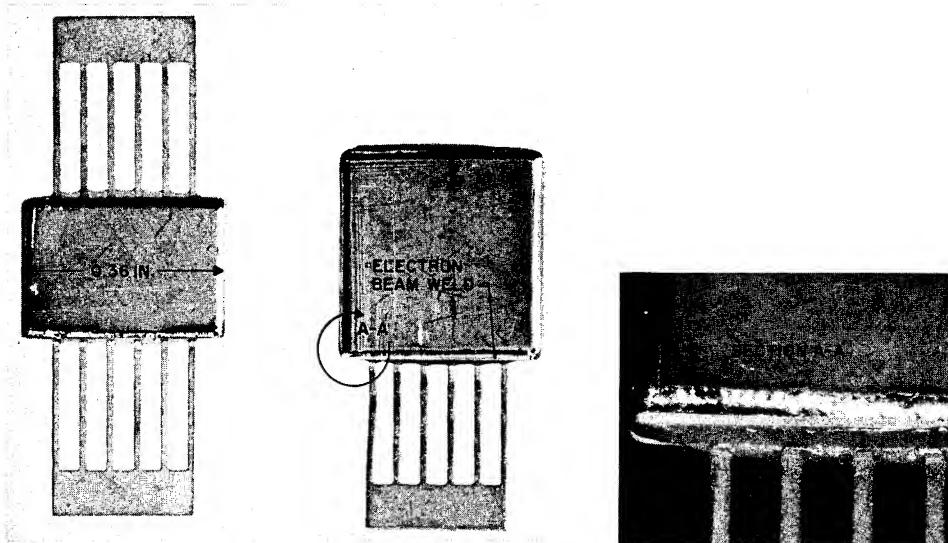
FEB packages hermetically sealed by electron beam welding.
